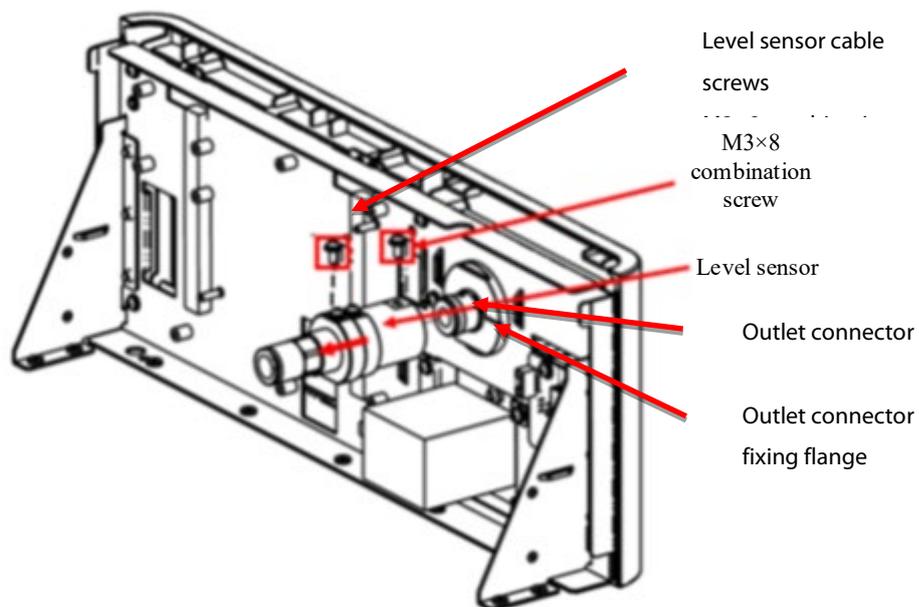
Disassembling the Liquid Sensor and Outlet Connector
